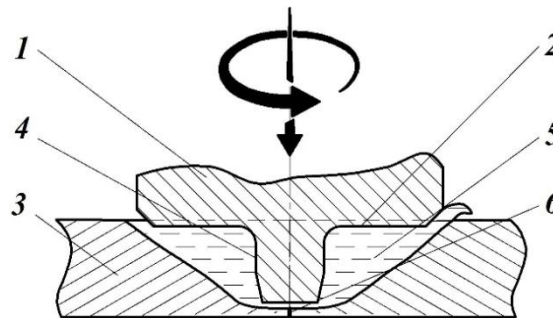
The process of friction stir welding of the butt joint:
